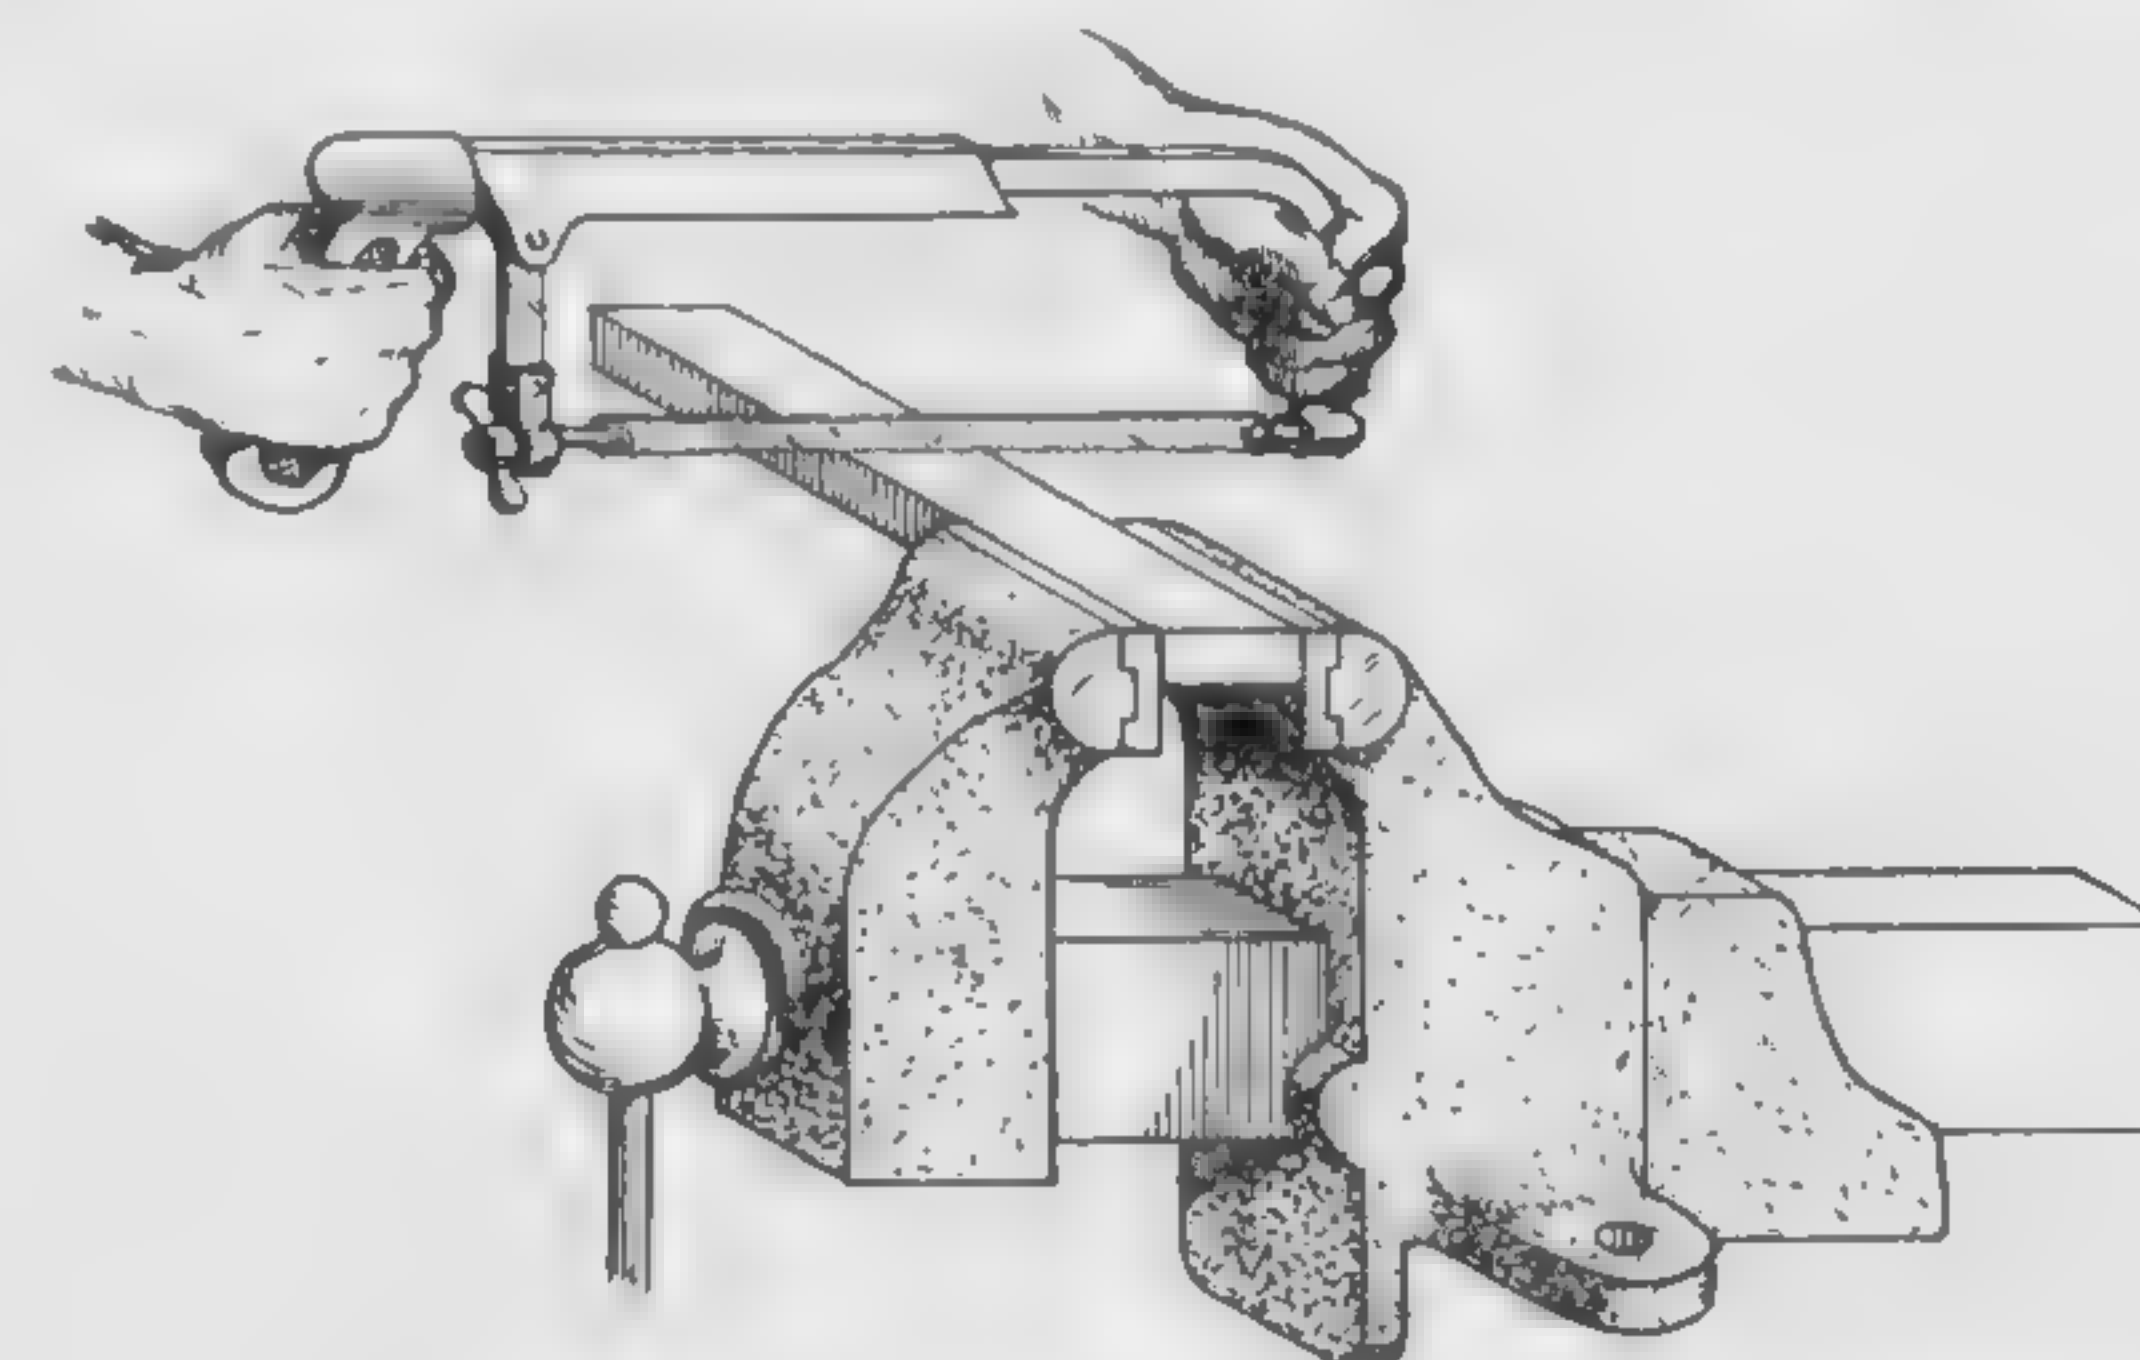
Correct Position of Hands for Sawing with a Hand Hack Saw
